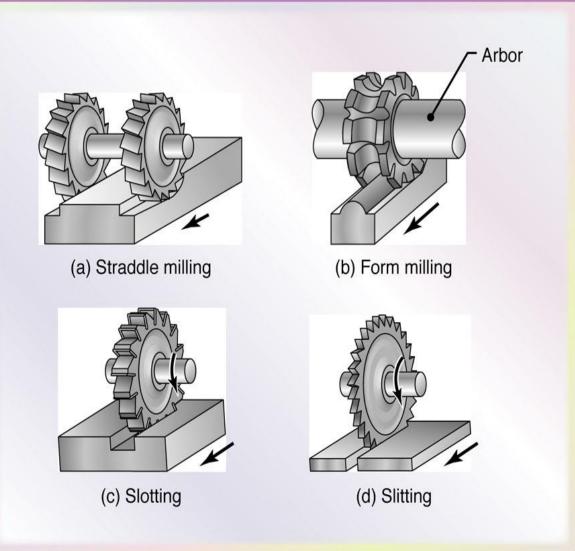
Cutters for (a) straddle milling, (b) form milling, (c) slotting, and (d) slitting with a milling cutter.
